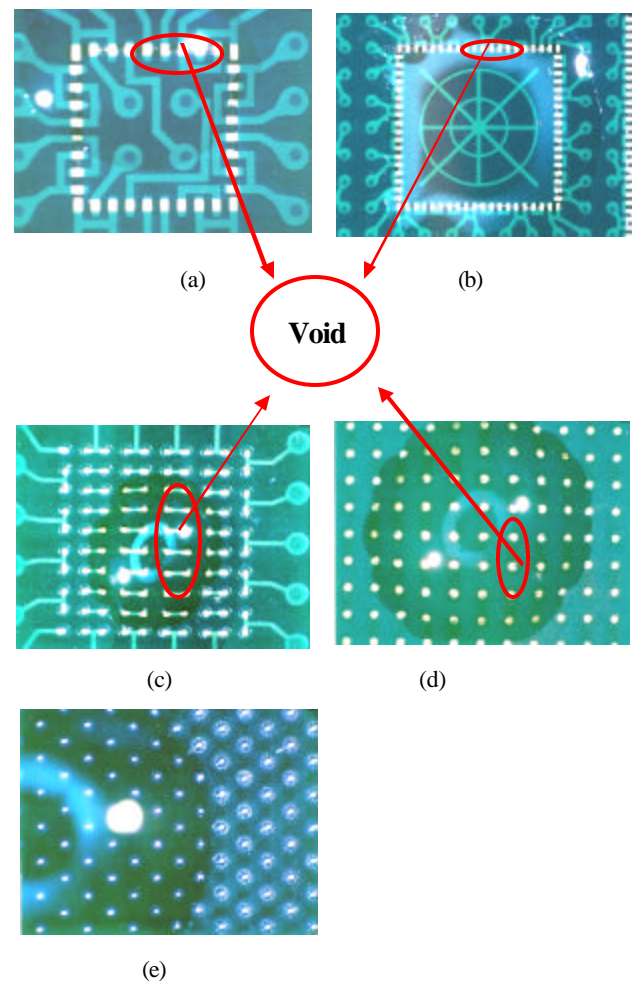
Images showing effects of bond pad design on trapped voids due to dispensing (a) Slot (b) Slot (3 row) (c) Pad define (d) Solder mask define and (e) Pre-solder deposition
